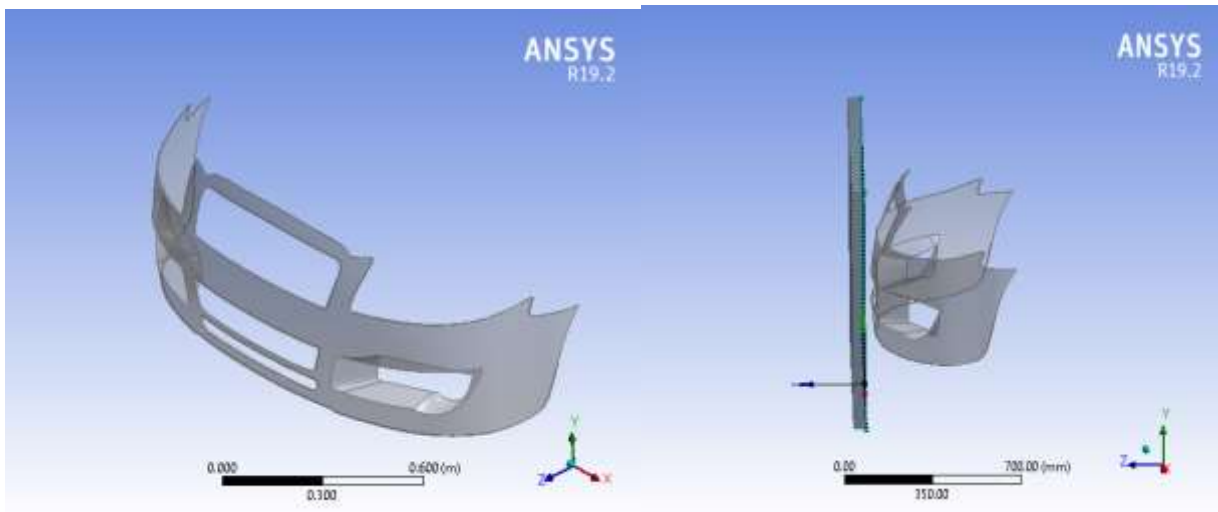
3D modelling of the front bumper cover with and without impact barrier.
